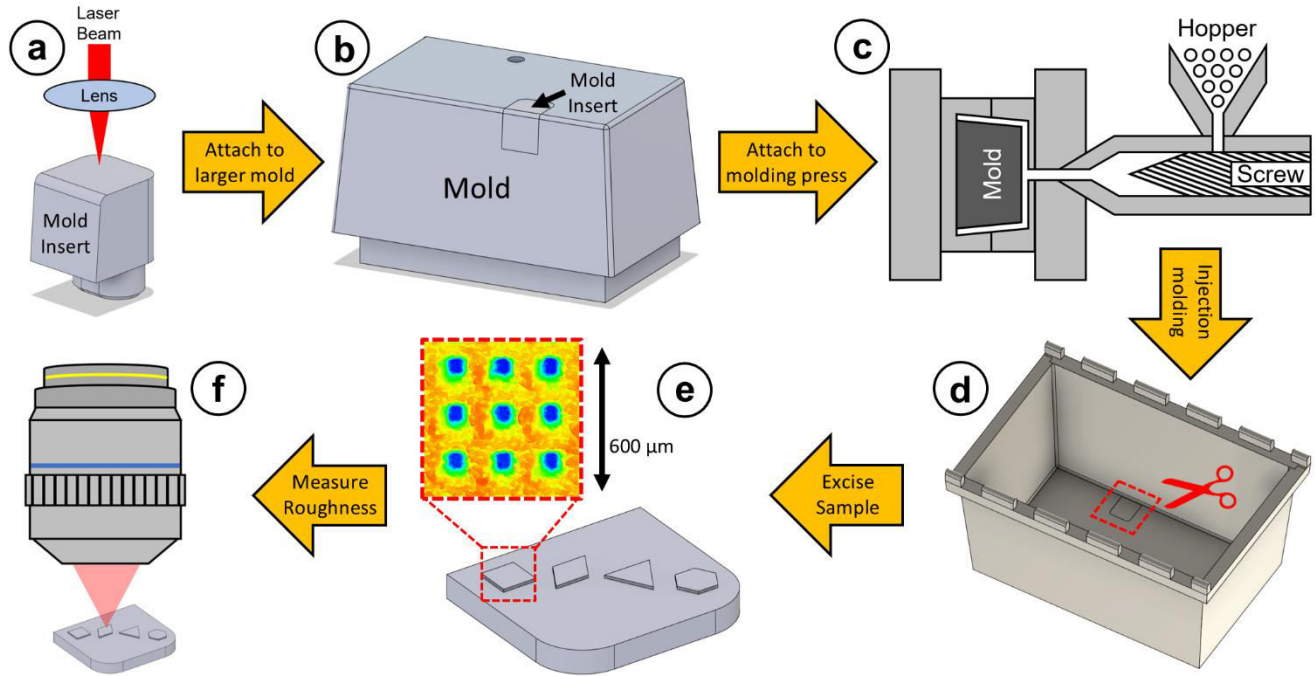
Flow chart of the experimental method: (a) A small steel mold insert ($1.50 \times 1.62 \times 1.35 \text{ cm}^3$) is laser micromachined to inscribe patches of geometric micropillars. (b) The mold insert is attached to a larger steel mold that defines the interior shape of a rectangular pail ($12.3 \times 8.1 \times 6.3 \text{ cm}^3$). (c) Injection molding is performed by attaching the mold assembly to a Toshiba 90A injection molding machine. The molding parameters are varied according to Table 2. (d) A small rectangular sample is cut from the larger pail at the location corresponding to the mold insert's position. (e) Schematic representation of an excised sample. The inset displays a confocal microscope image of a square pattern replicated on the polymer. (f) The roughness of the secondary microbumps that decorate the replicated primary geometric cavity arrays is measured via confocal microscopy.
